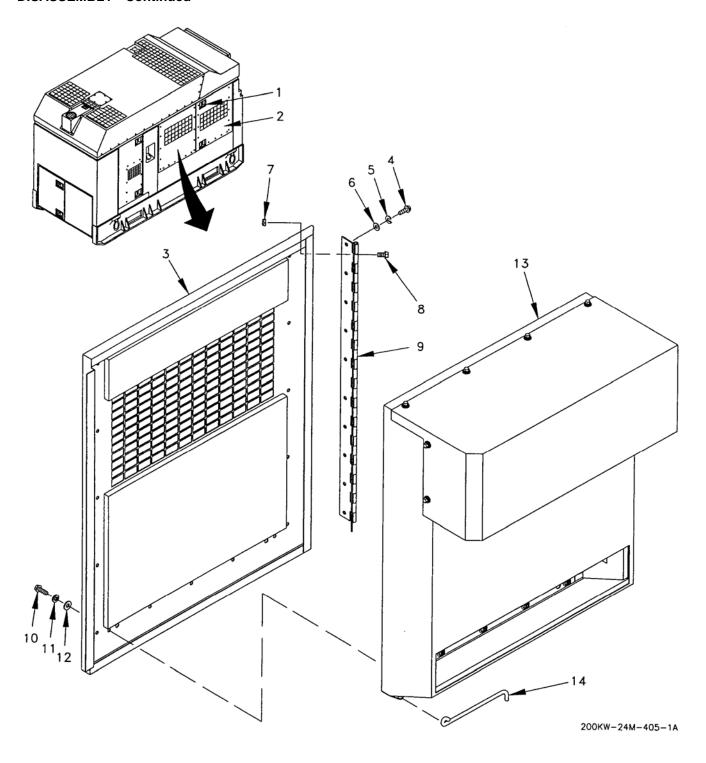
Left Rear Door Assembly (Sheet 1 of 2).
